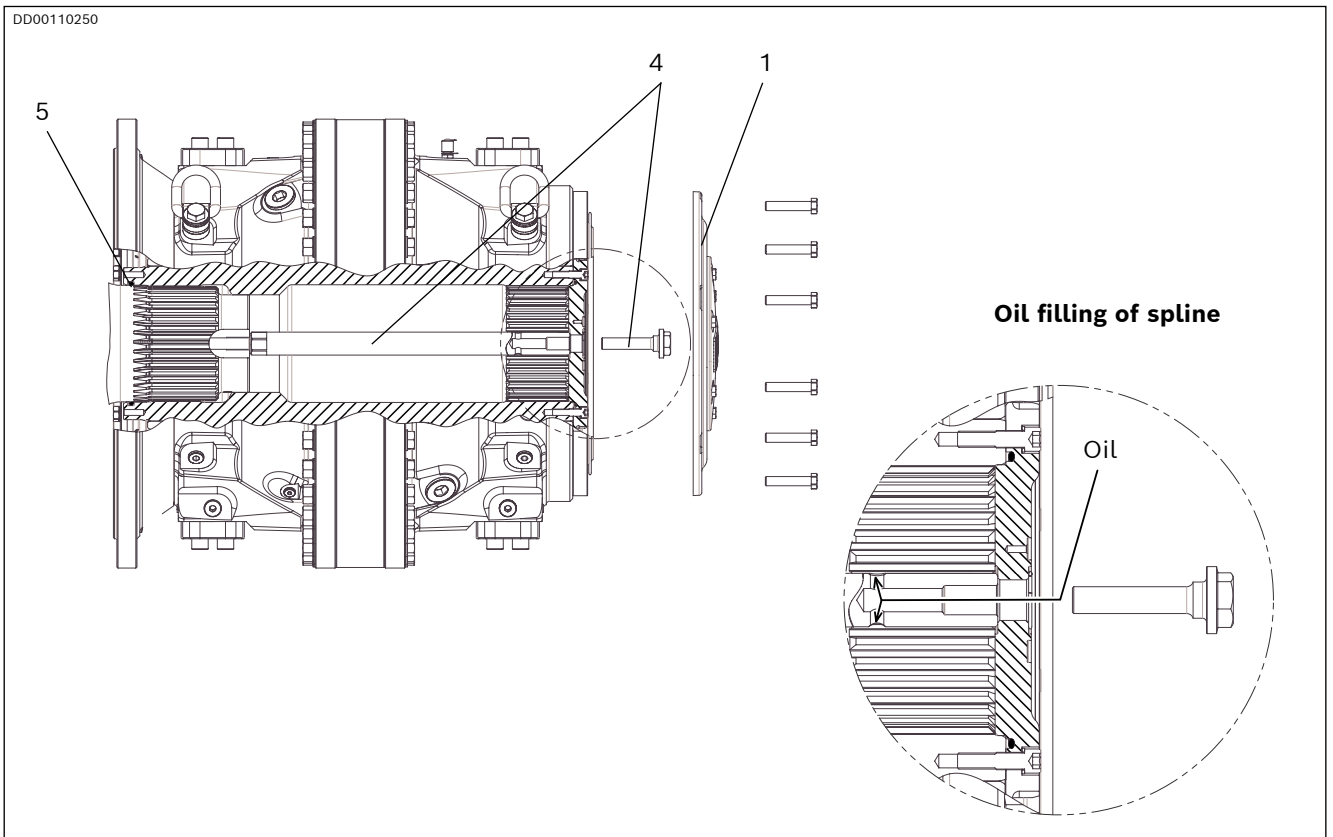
Fix the spline motor with the mounting kit, horizontal mounting
